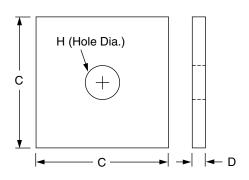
WEIGHT (LBS) • DIMENSIONS (IN)
